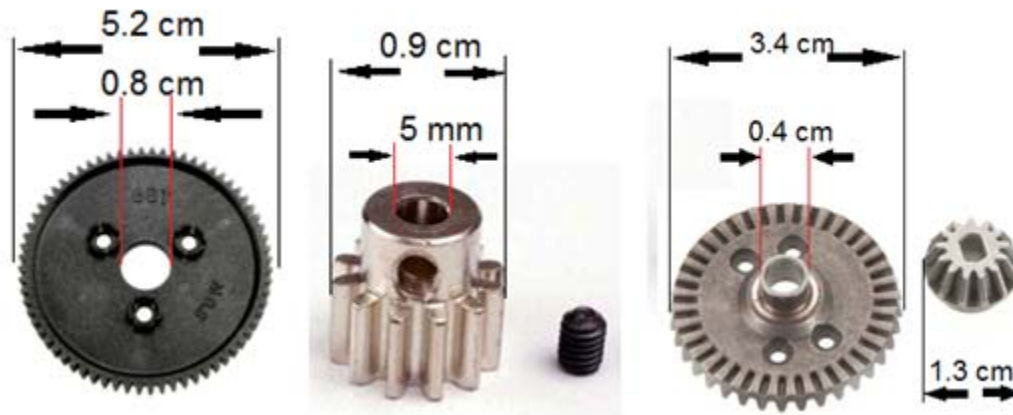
Different types of gears used: Spur gear (left), Pinion gear with screw (middle) and Bevel gear set (right) [1,2]
